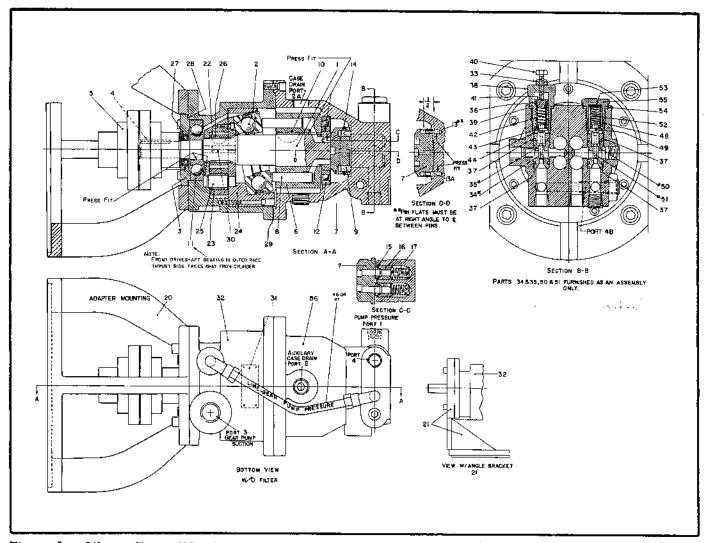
Oilgear Type "HG" Pump Parts Drawing, DS-946600B (57143)
